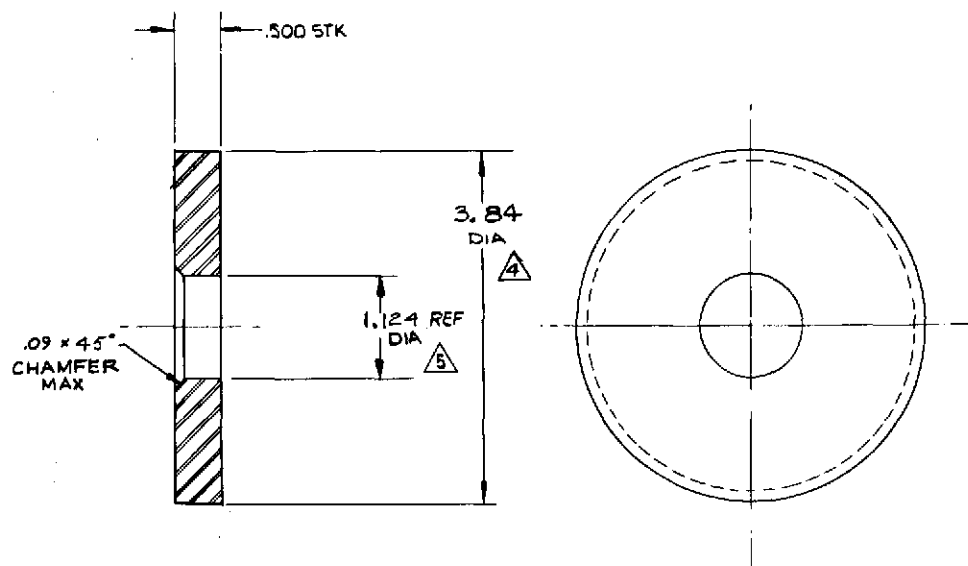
Nozzle assembly, separator - 100-kW erosion loop
